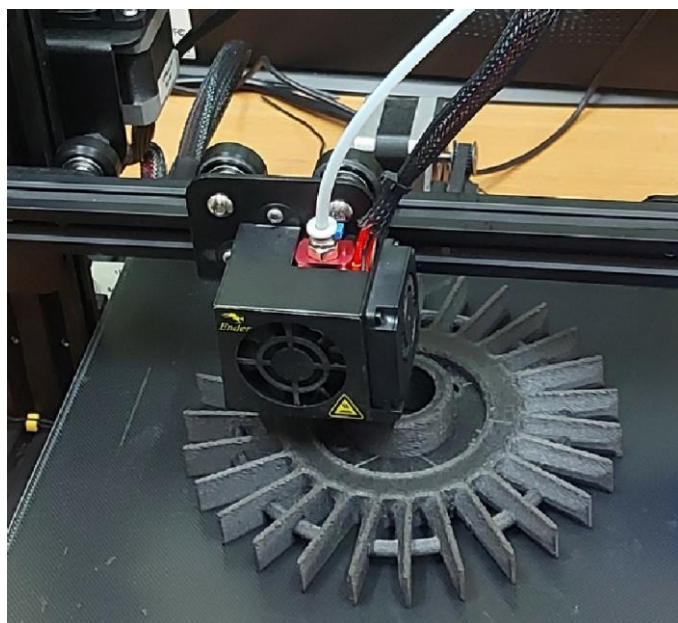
Final stage of FDM impeller fabrication [own materials].
